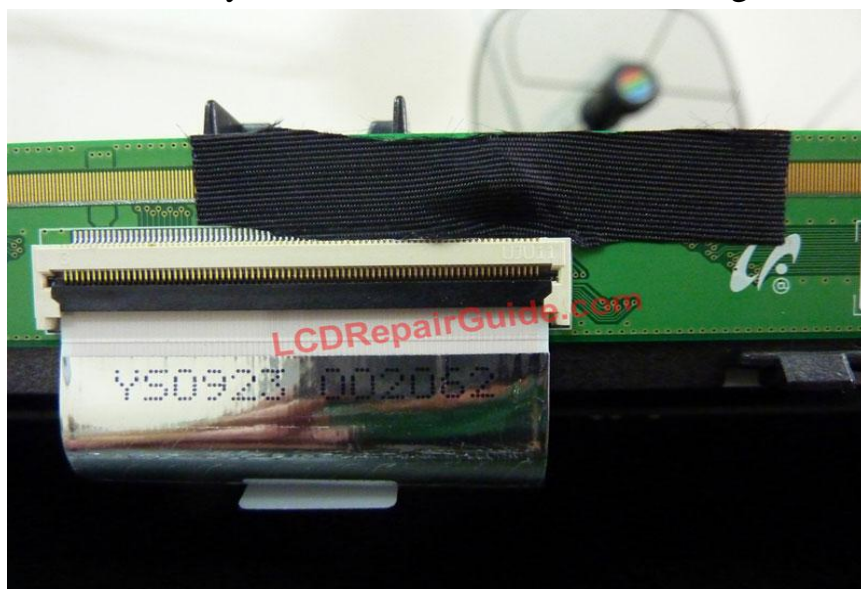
Using cloth tape on the modify surface to avoid any short circuit occur.
